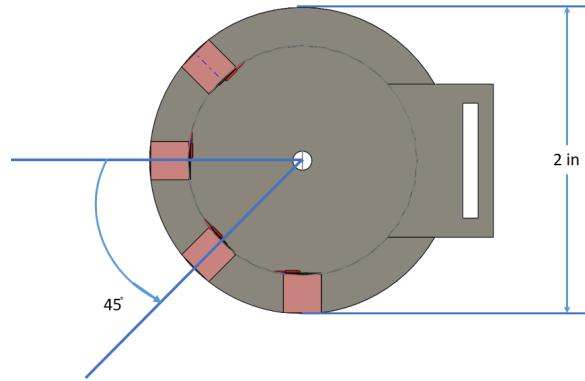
Heat flux gauge design center cut view. Cylinder dimension and gauge placement is shown.
